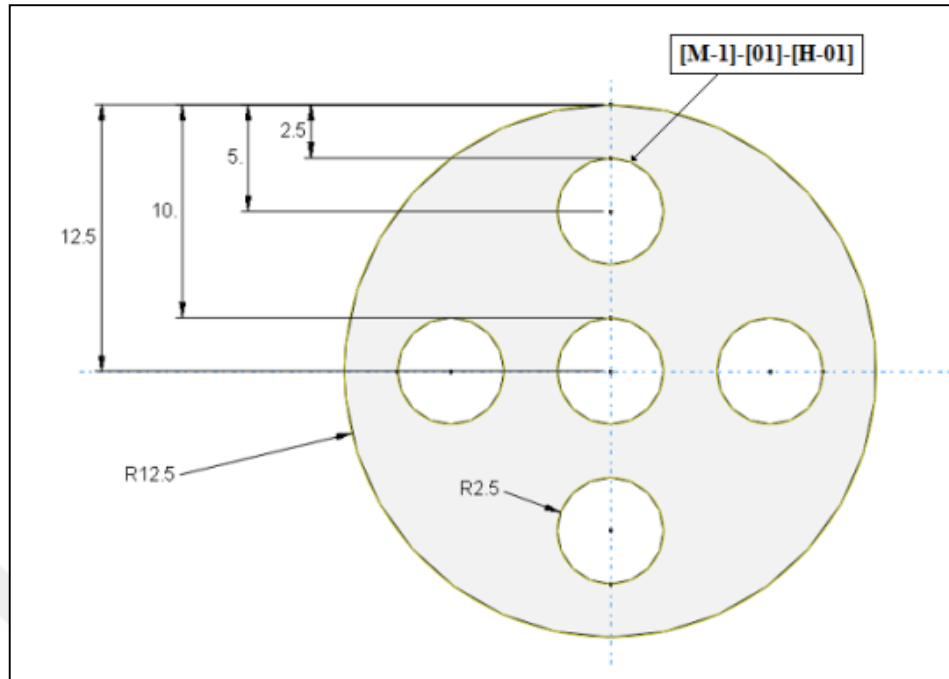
The hole configuration on the specimen and hole numbering system (all dimensions in mm).
